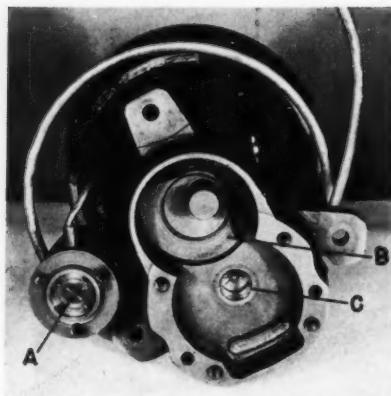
Bottom view of compressor frame after parts shown in Fig. 4 are removed.
